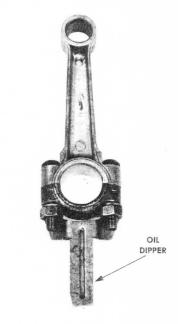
Horizontal crankshaft engines use a dipper on the connecting rod.
